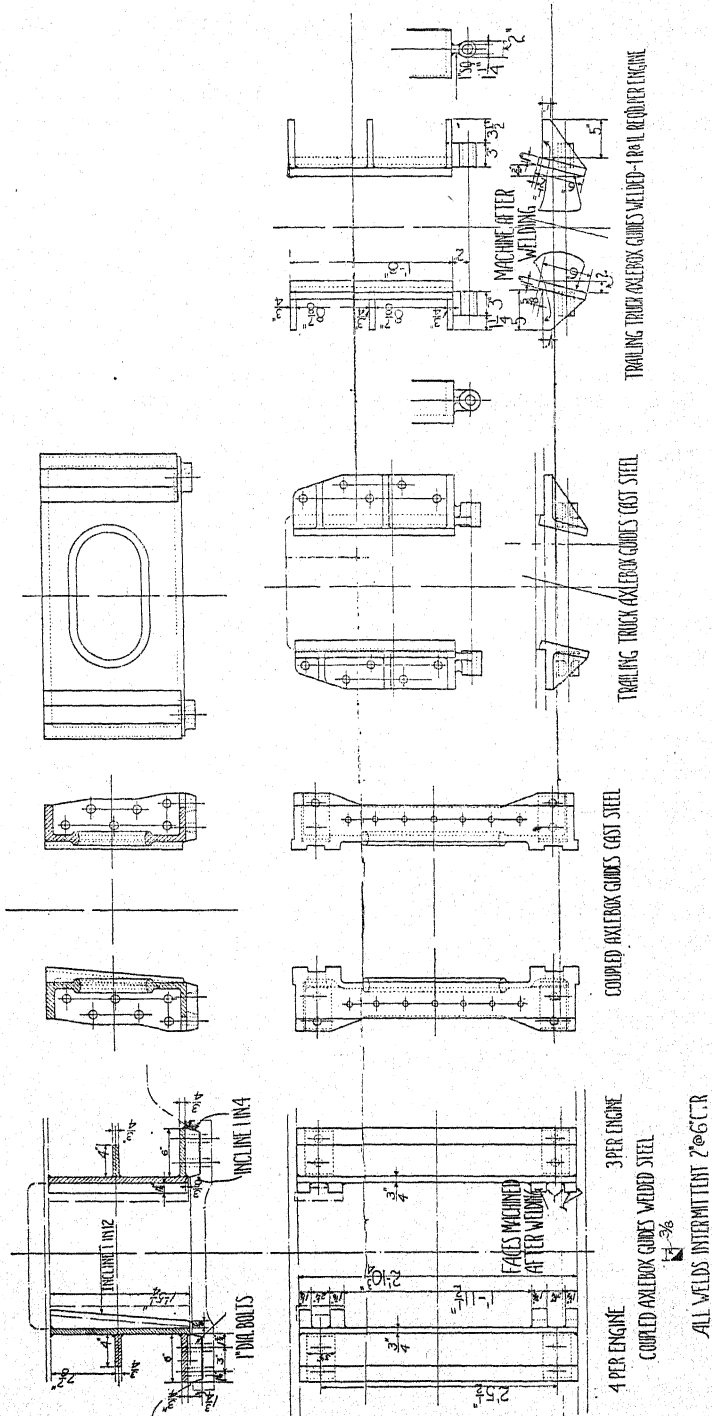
Coupled axle box guides, (pedestals), in cast steel with arc welded counterparts.
